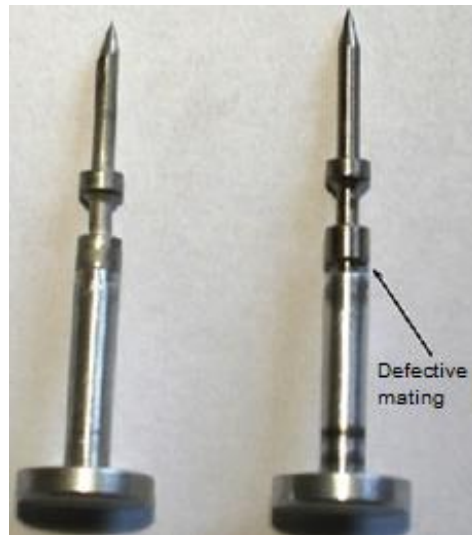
Firing pin of the M12 fuze: correct assembly (left); defective assembly (right)
